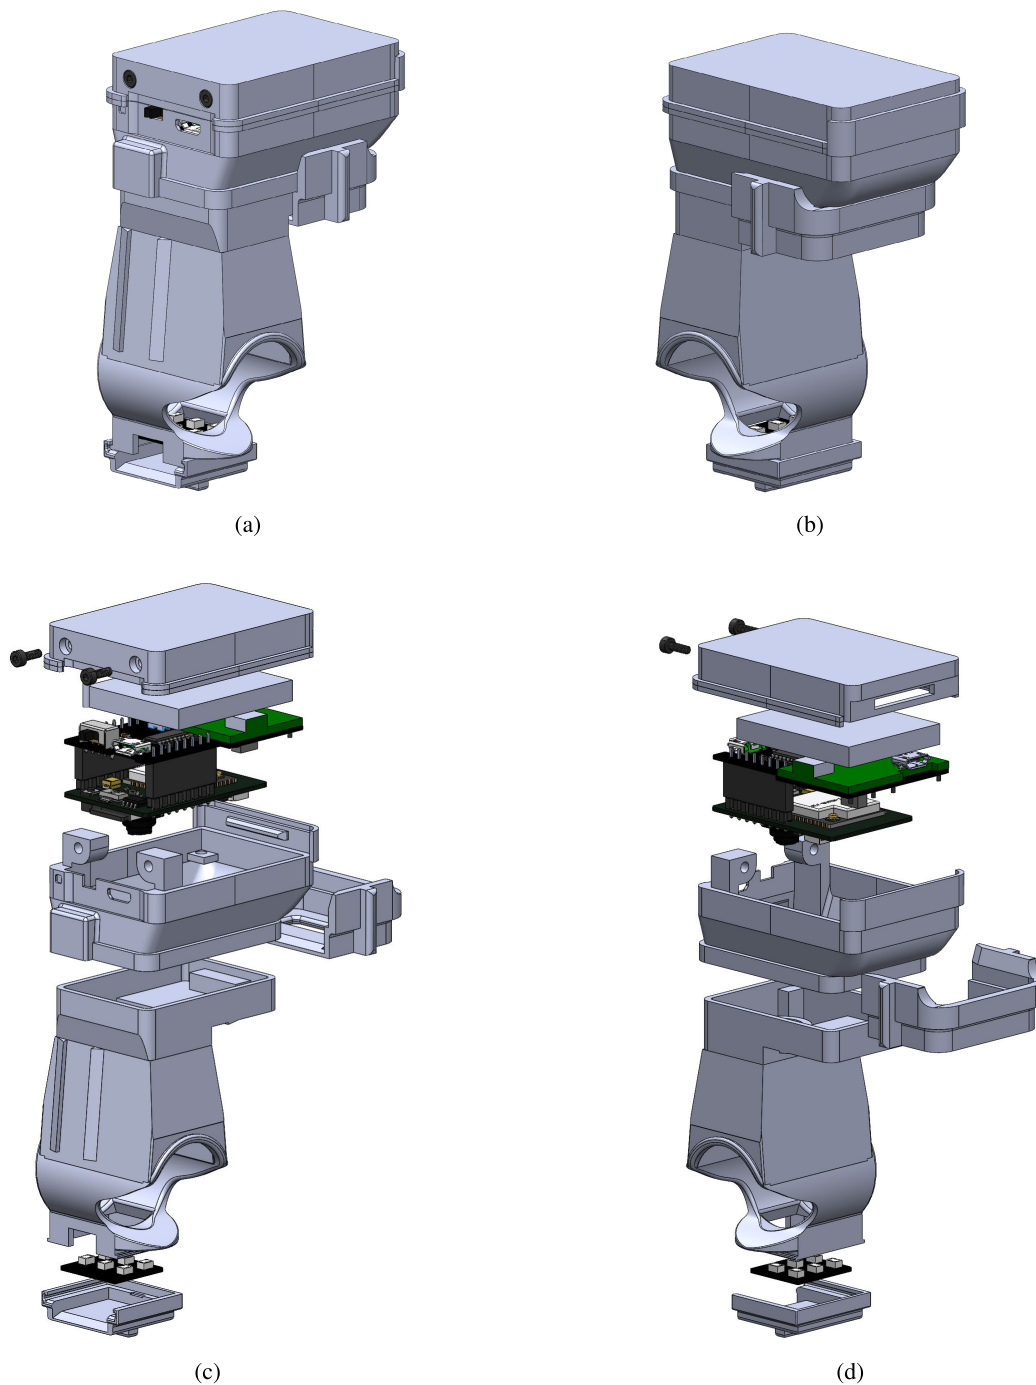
Device 3-D rendering from different perspectives. (a) and (b): assembled views; (c) and (d): exploded views.
